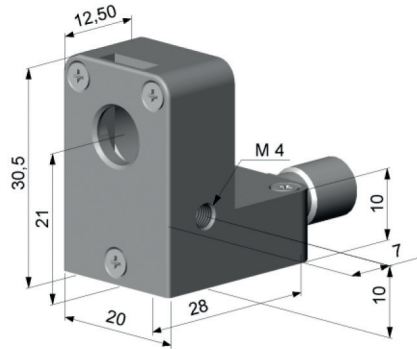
Laminar air purge collar - the sideward air outlet prevents a cooling down of the object in short distances; hose connection: 3x5 mm [TM-APL-CS]
